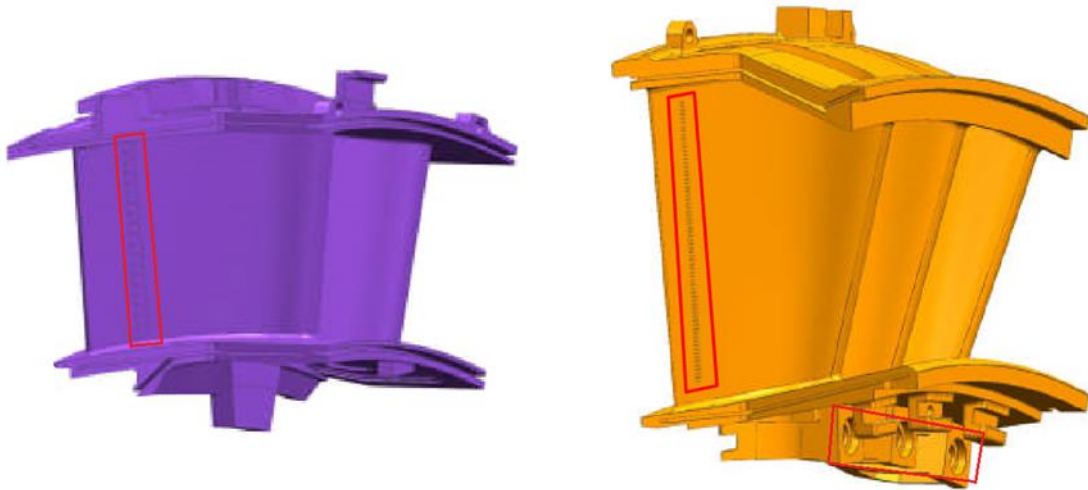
On the left the first stage nozzle with highlighted holes on the trailing edge, on the right the second stage nozzle with highlighted holes on the trailing edge and three tubes assembled on the diaphragm
